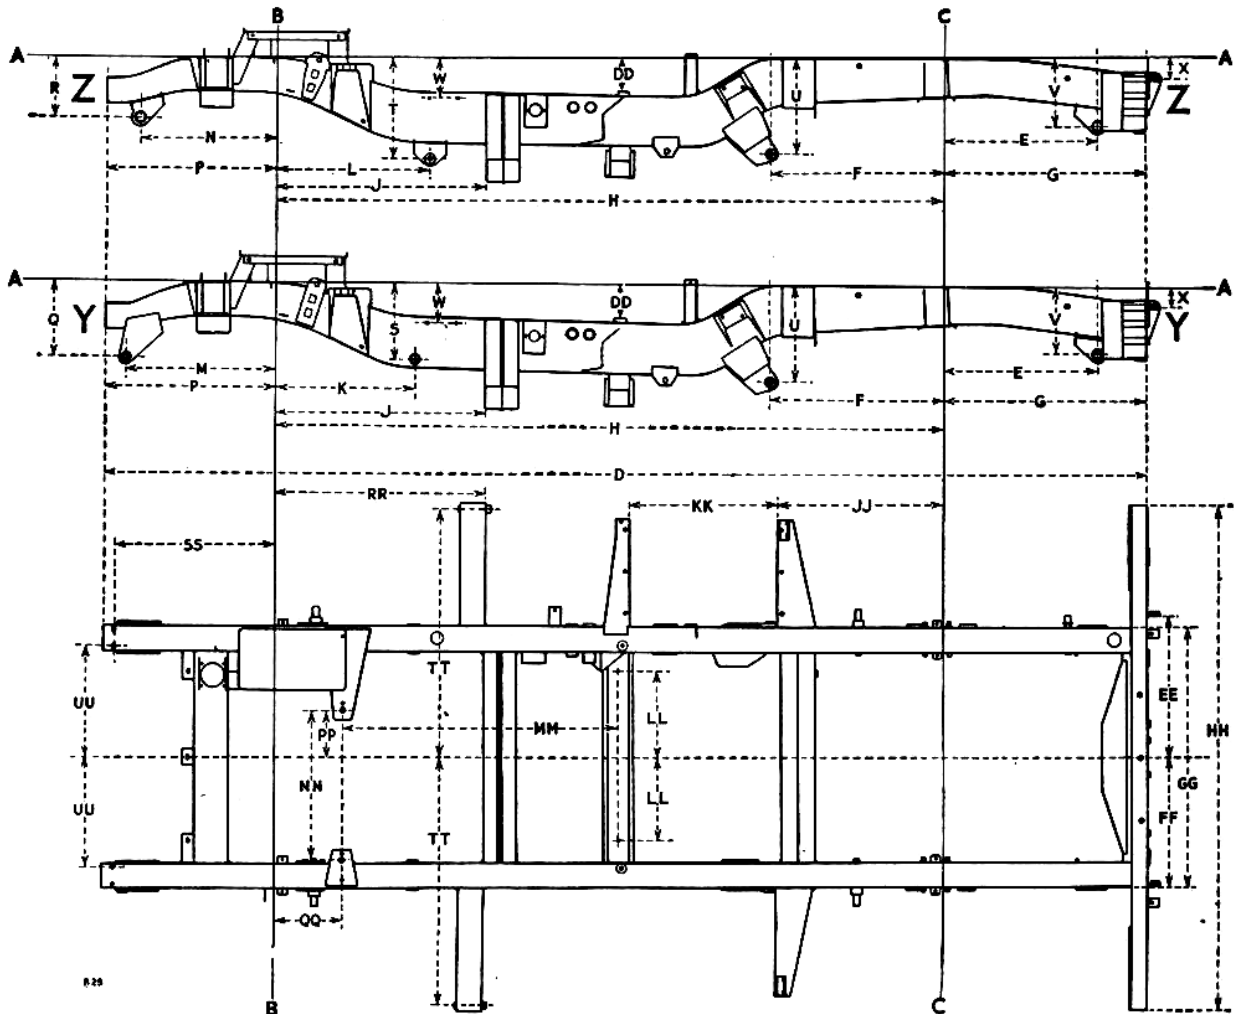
Chassis frame dimensions (Land-Rover 80)
